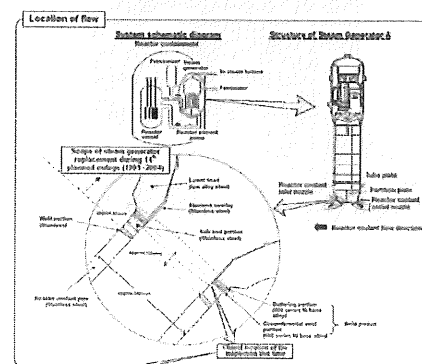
Location of Flaw (Nozzle Welding of Steam Generator)
